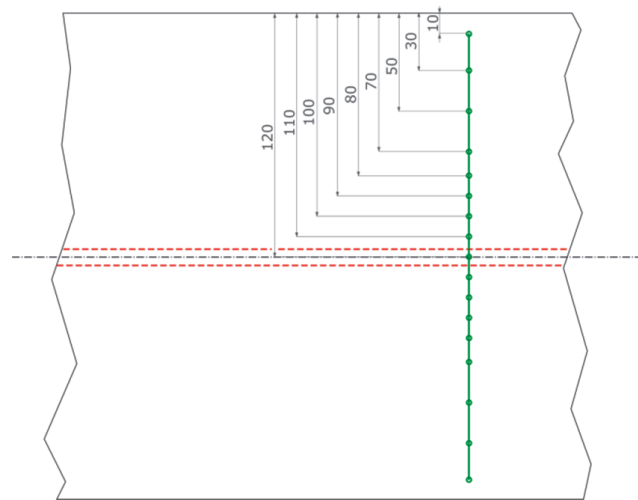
Arrangement of measurement points on the double T-bar flange surface
